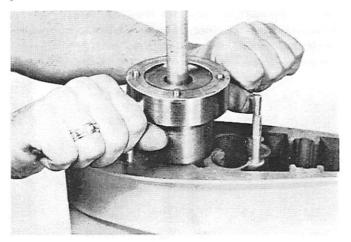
Removing and Installing Drive Shaft Bearing Retainer Cover
